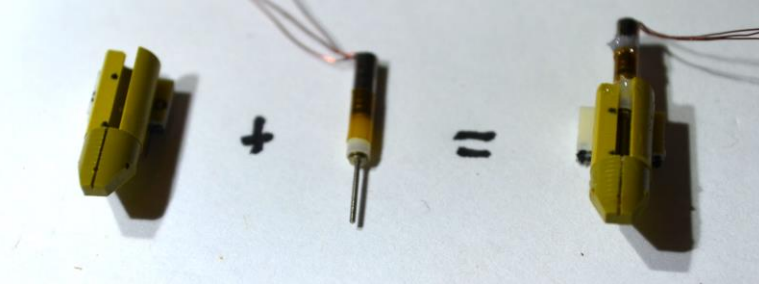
Glue motor in place at the top of the body. Use the tip to gauge how far the motor axis rests within the shuttle guide slot.
